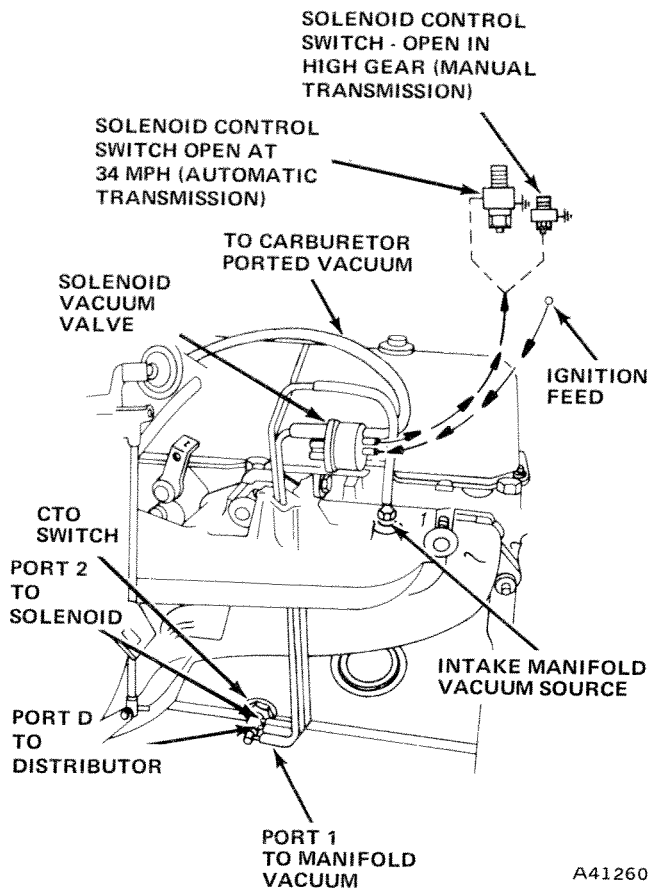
A-33 Typical TCS System - Six-Cylinder Shown
